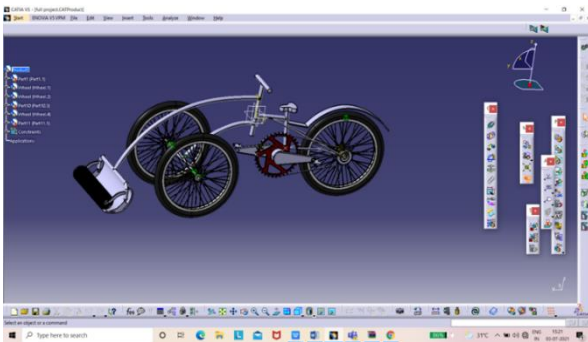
Complete Design and Assembly of Eco-friendly Vehicle.
